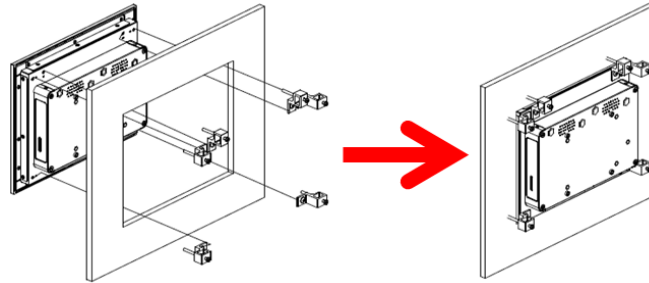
Screwing the Panel PC firmly to the panel frame.
